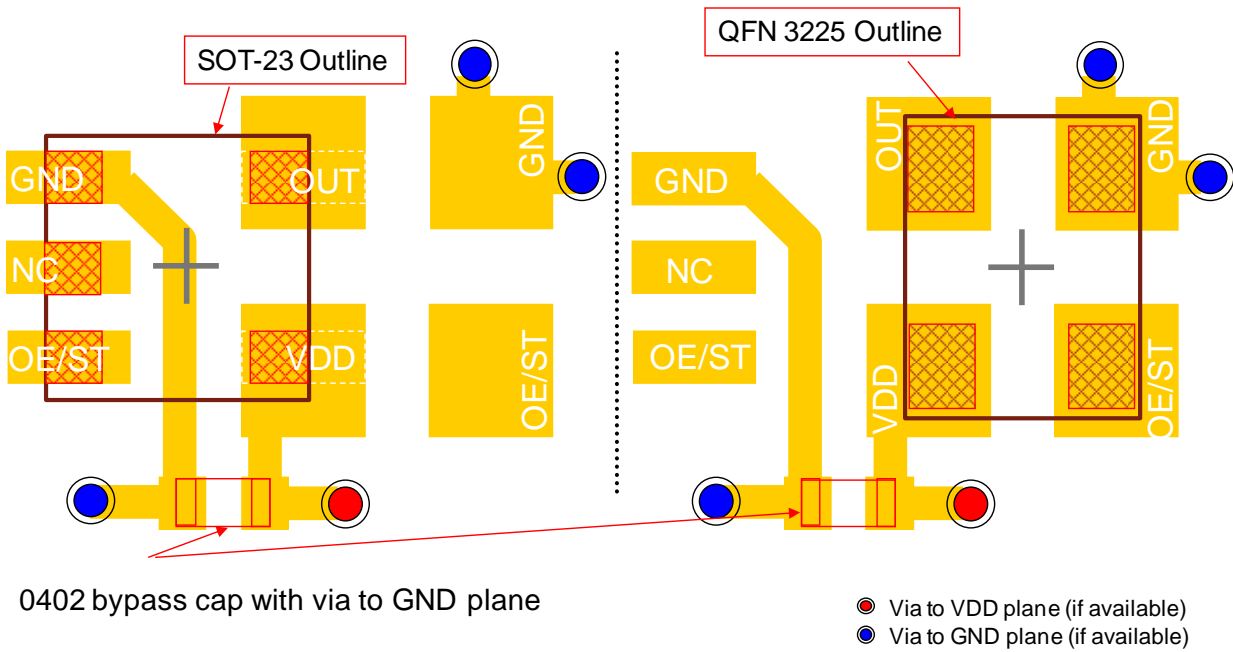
QFN 3225 and SOT23-5 co-planar design layout example showing placement of both QFN 3225 and SOT23-5 devices
